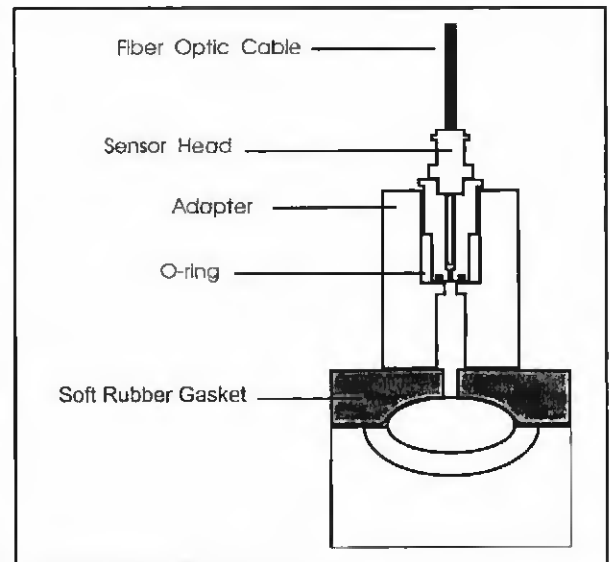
Design for prototype diffusible-hydrogen weld sensor with soft rubber gasket.
